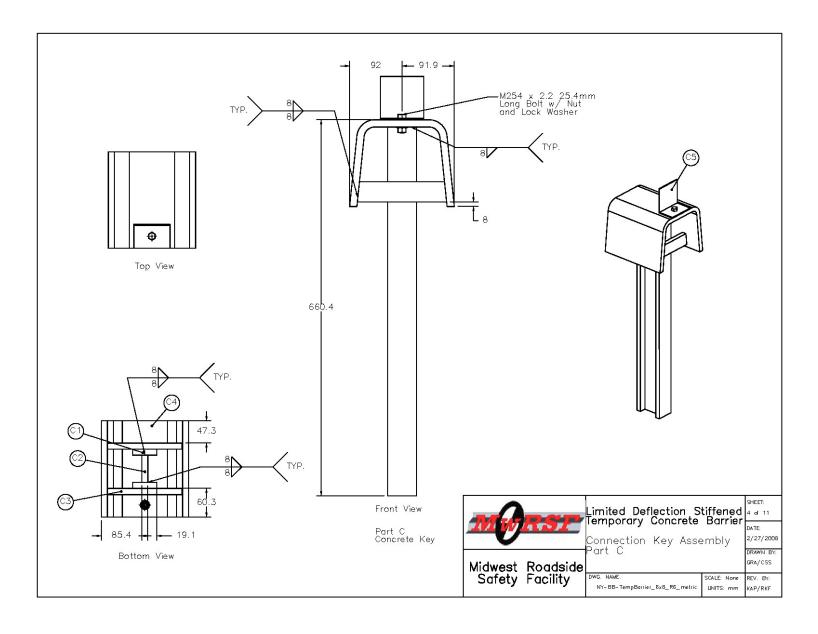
Connection Key Assembly Details, Test NYTCB-3
